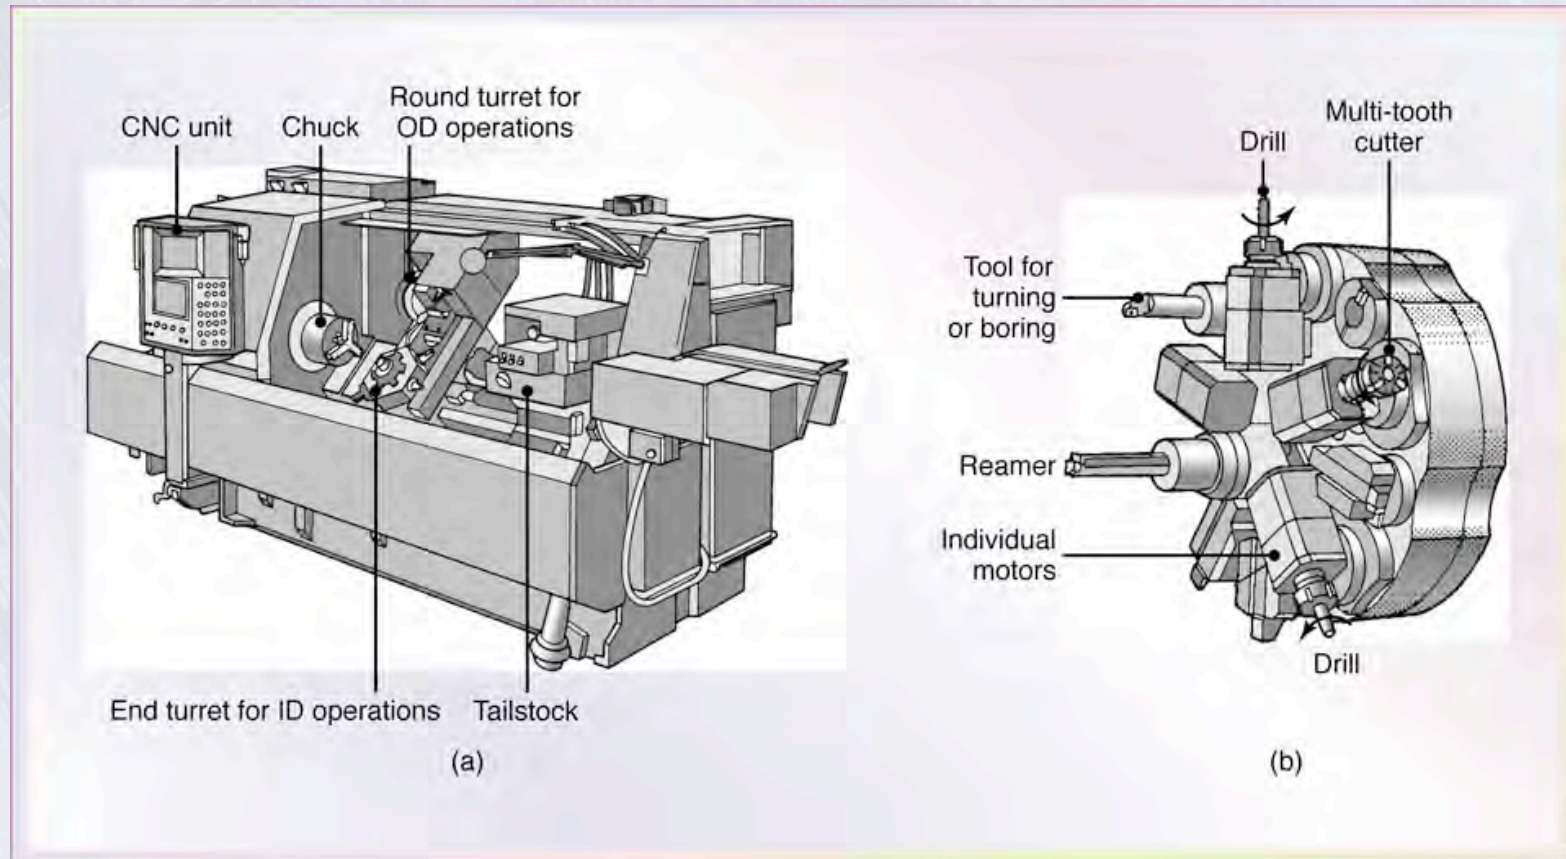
(a) A computer numerical-control lathe. Note the two turrets on this machine. These machines have higher power and spindle speed than other lathes in order to take advantage of new cutting tools with enhanced properties. (b) A typical turret equipped with ten tools, some of which are powered.
